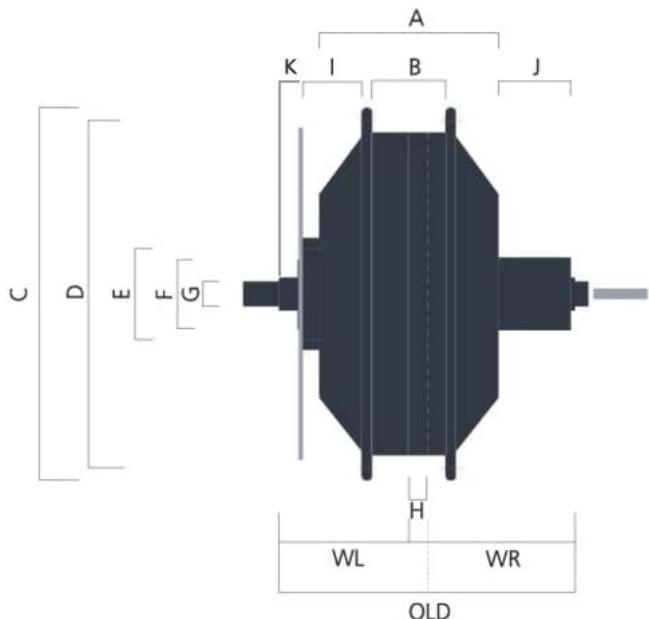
Technical specifications and dimensional drawing of the BAFANG G060.750.DC motor.
